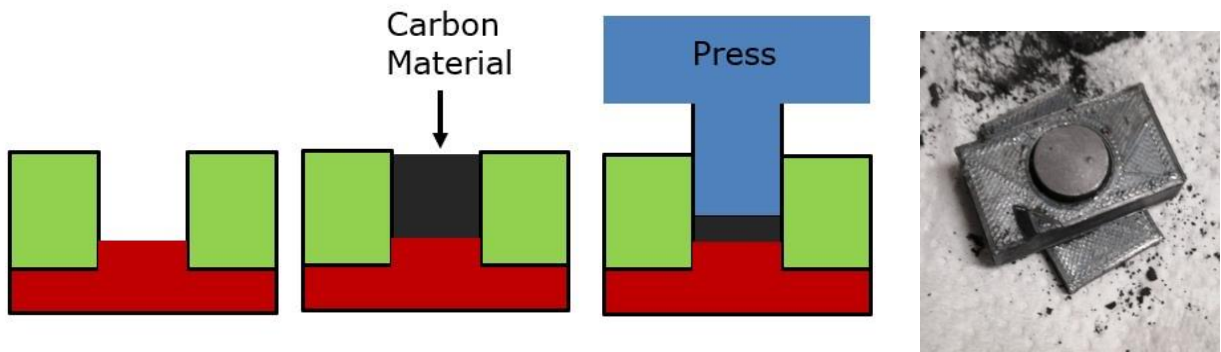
3-piece Press Mold designed for Hand Press with 3D Printed Comparison
